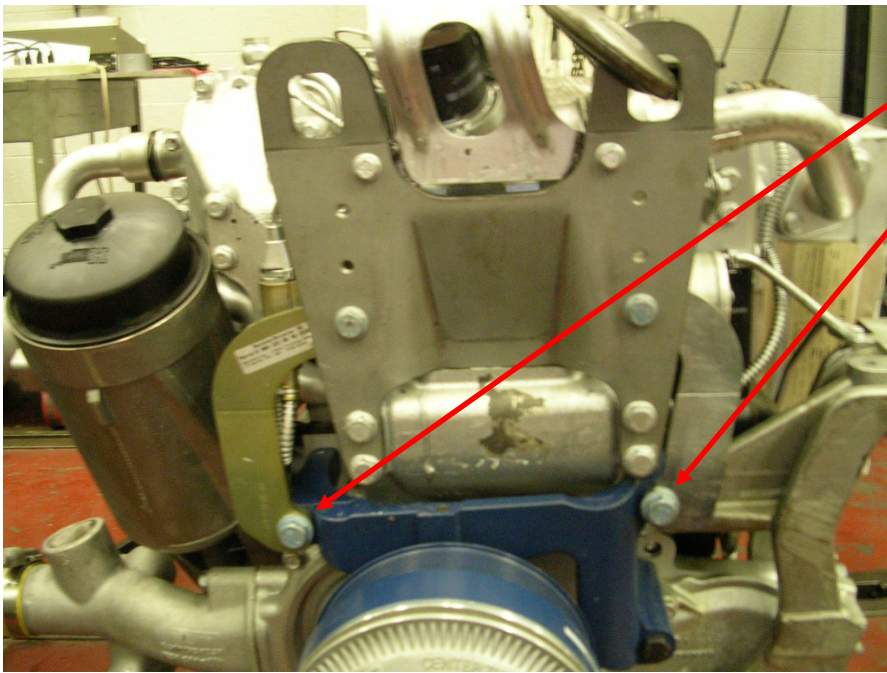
Right Side Support Bracket Installation for Freightliner/Sterling
